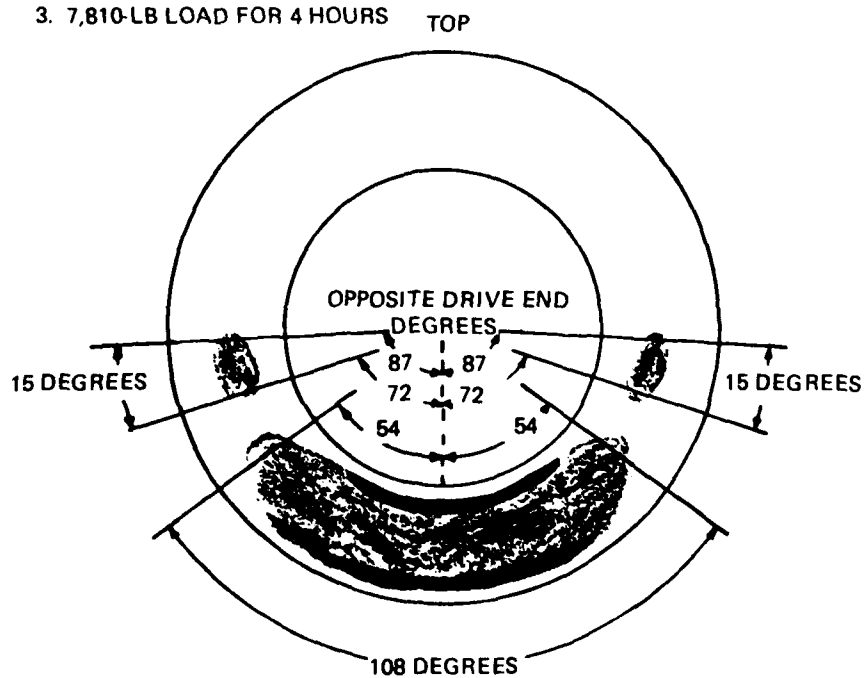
Load Zone Test on Slave Bearings After Housing Modification.
